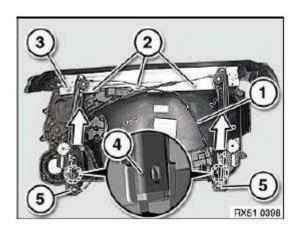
Removing Power Window Unit With Retaining Plate And Bracket From Carrier Courtesy of BMW OF NORTH AMERICA, INC.
